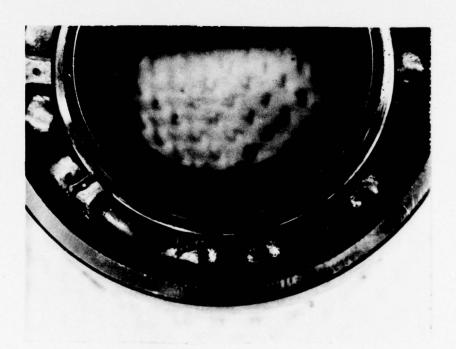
Bearing S/N TRL-17. 2.5x Enlarged View.
